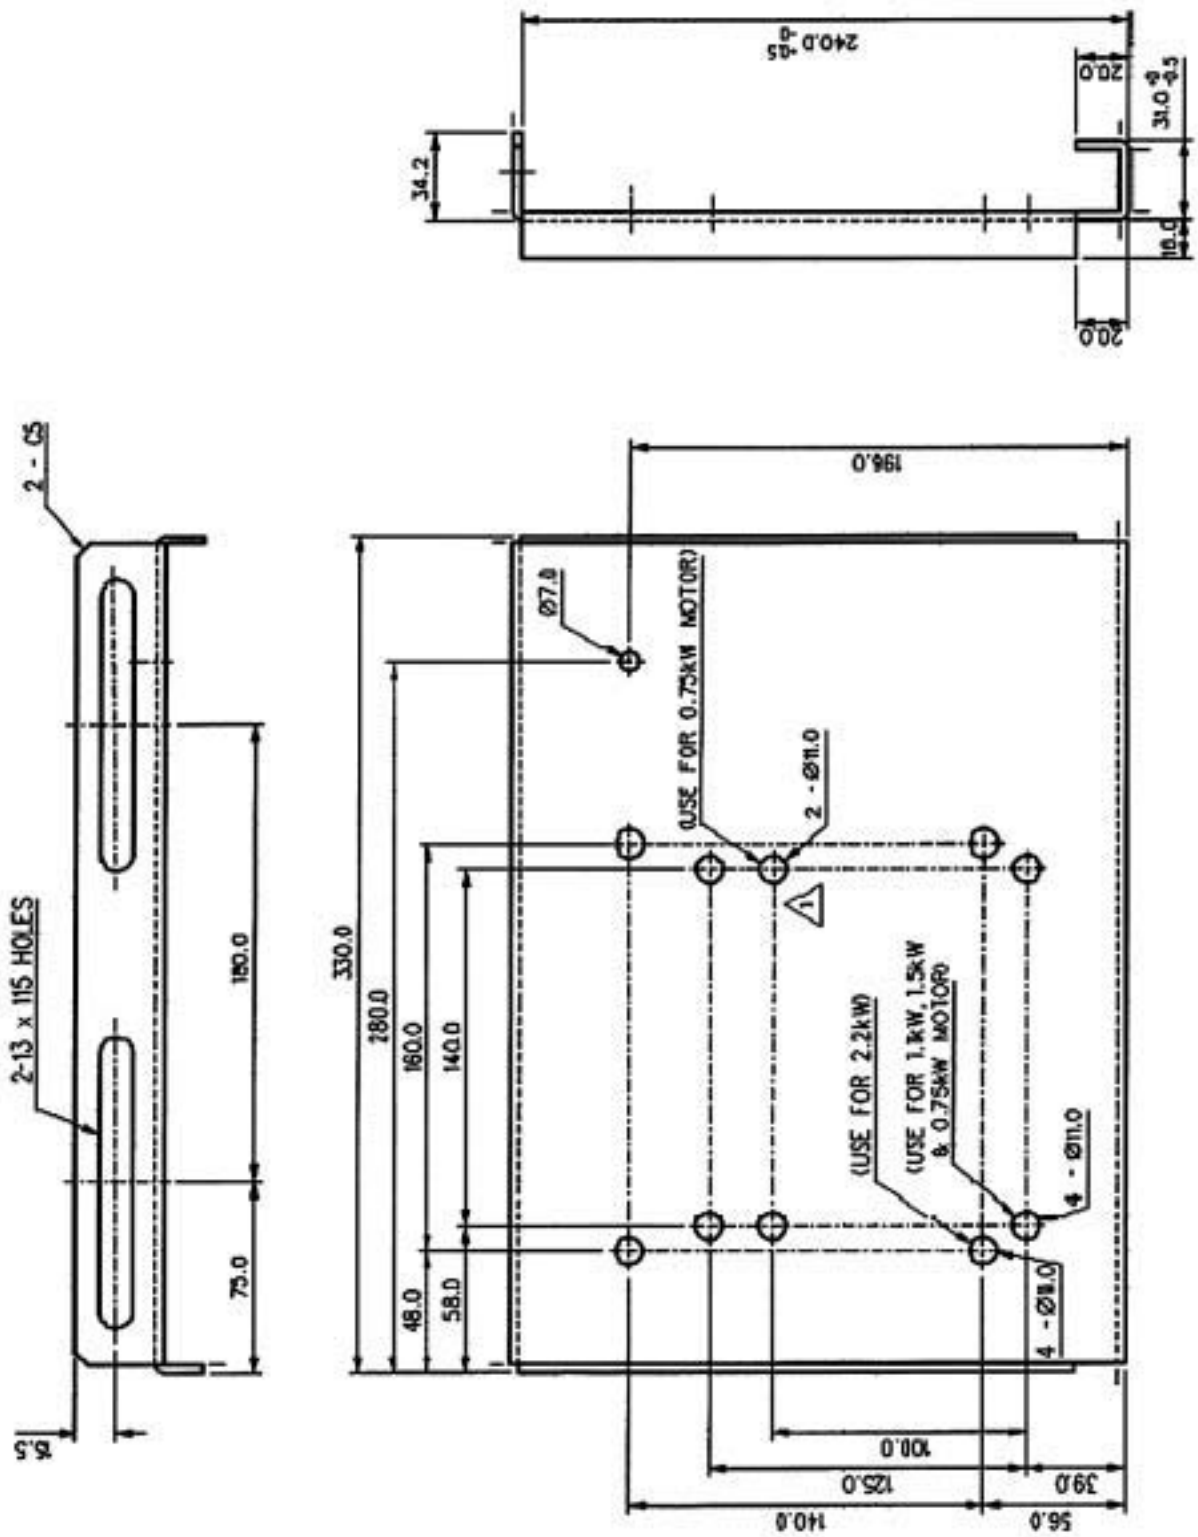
(a) Motor Mounting Base for UATP/TYP/T/TY180/240/280/320A
